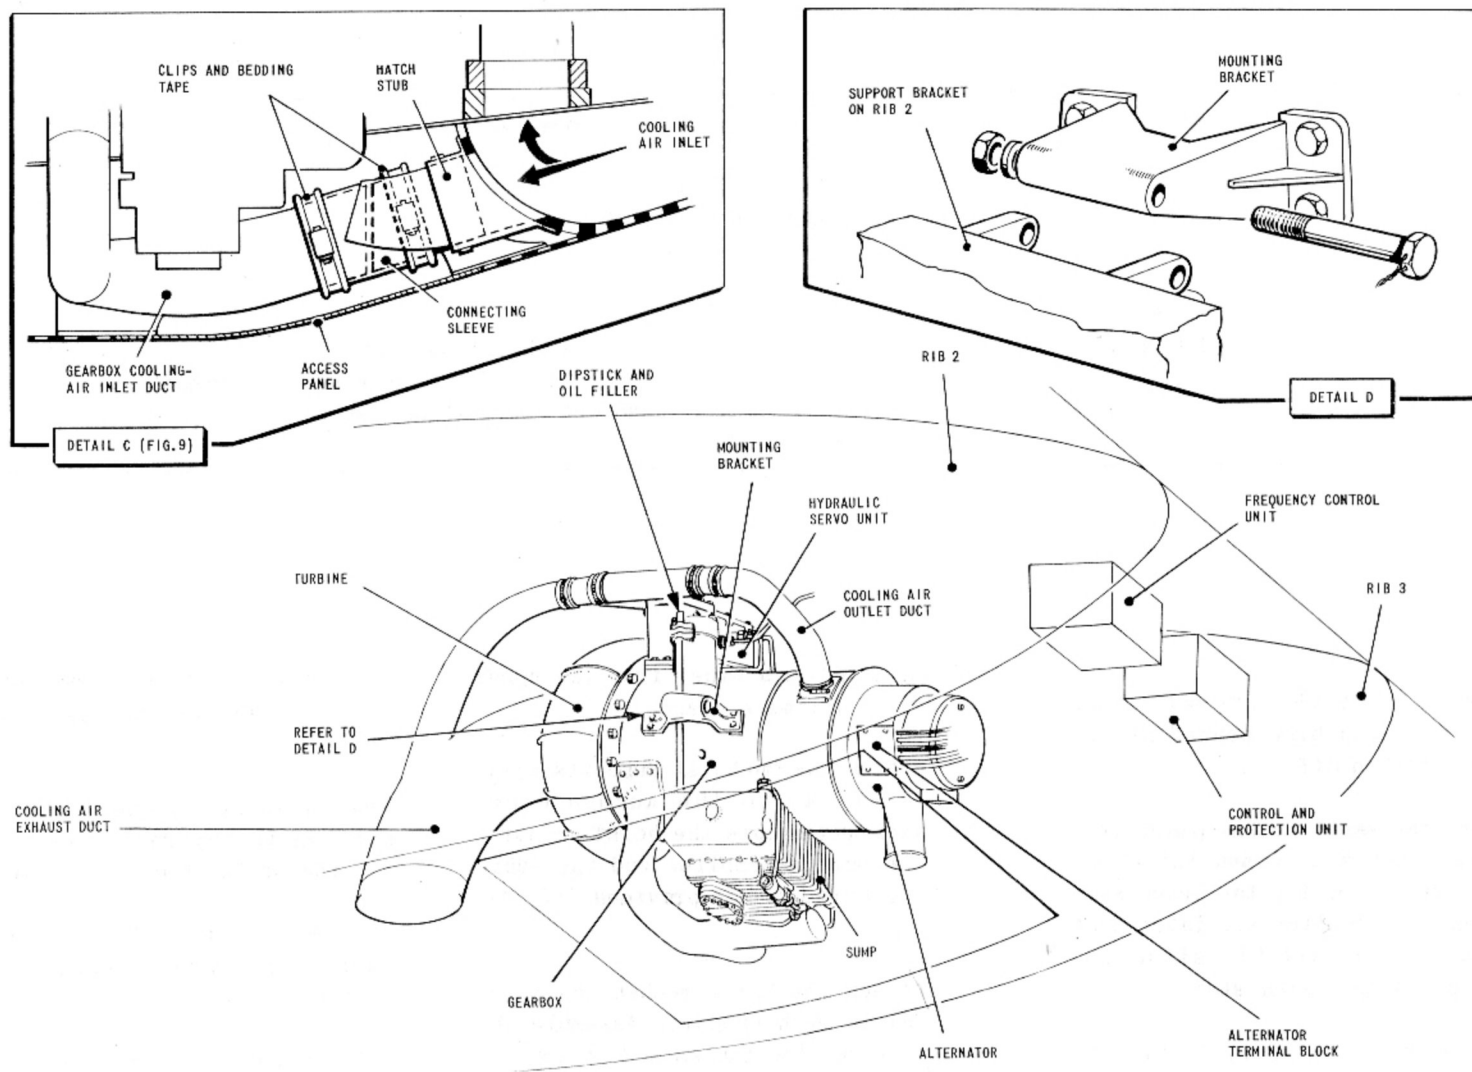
TURBINE - GEARED ALTERNATOR - REMOVAL AND ASSEMBLY (2)
